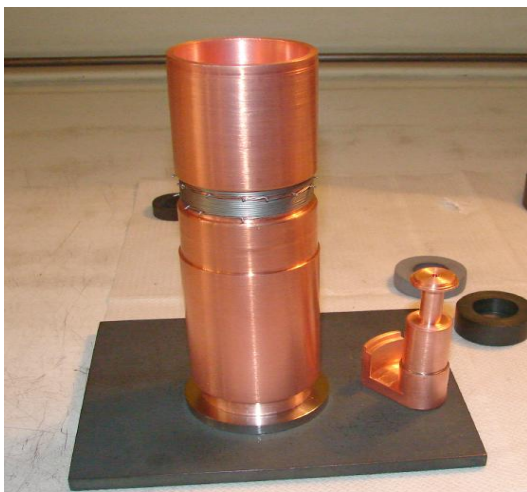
Coupler parts before first cycle of brazing in hydrogen furnace
